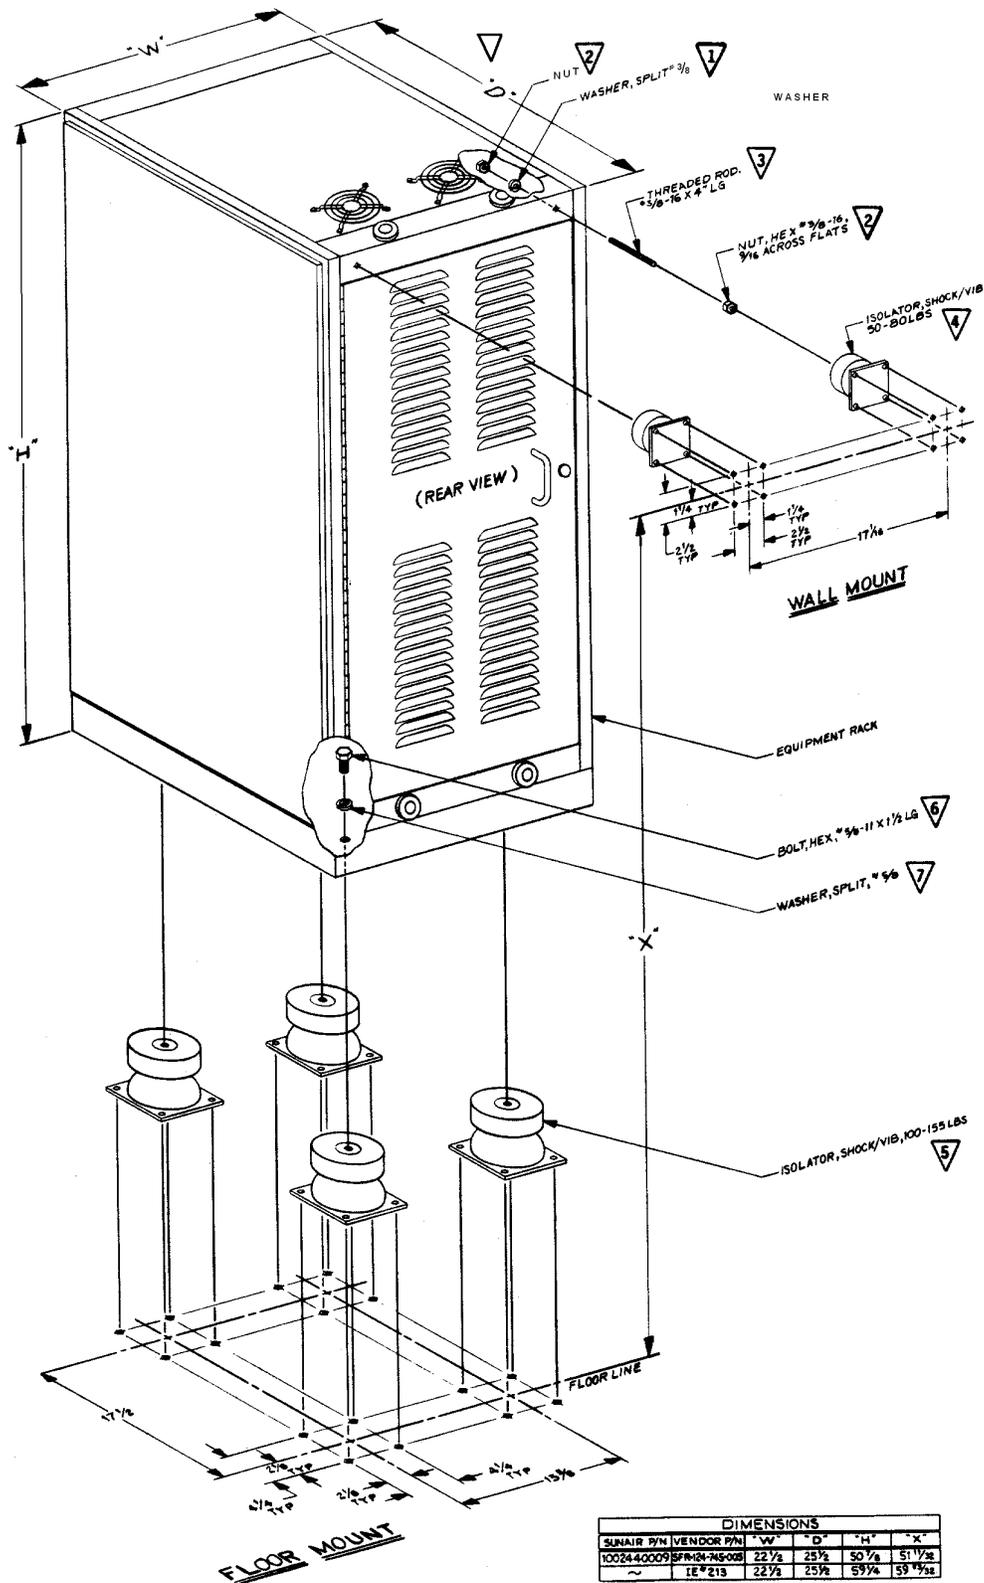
Shockmount Equipment Rack with Outline Dimensions and Details
